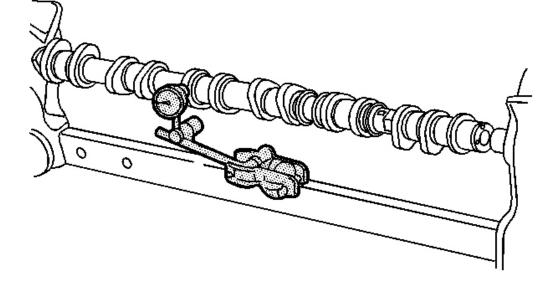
Measuring Camshaft Runout & Lobe Lift Courtesy of GENERAL MOTORS CORP.
